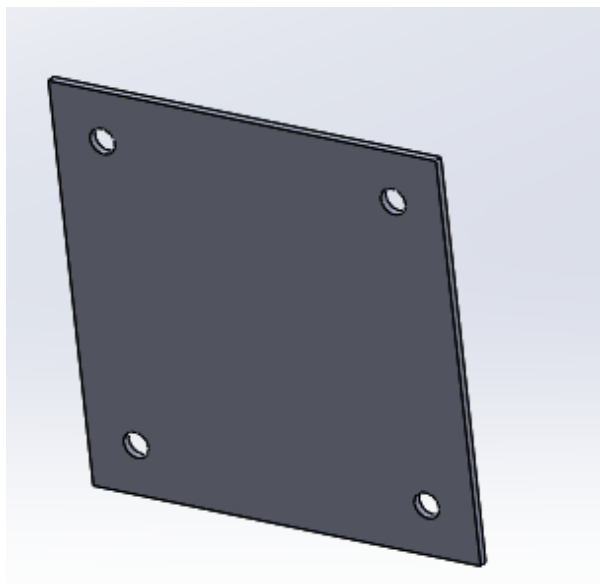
Steering Motor Mount Base Solidworks Model.
